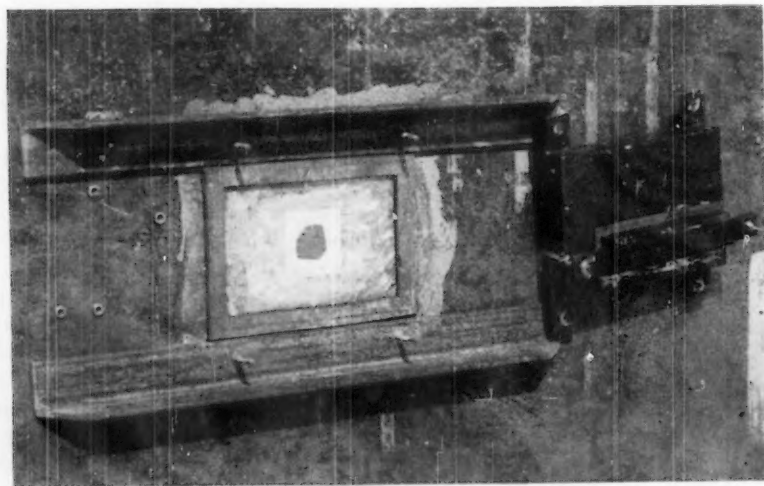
Location Adjacent to Butt Prepared for Welding, Showing Strain Gage, Protective Cover, and Watertight Gasket.
